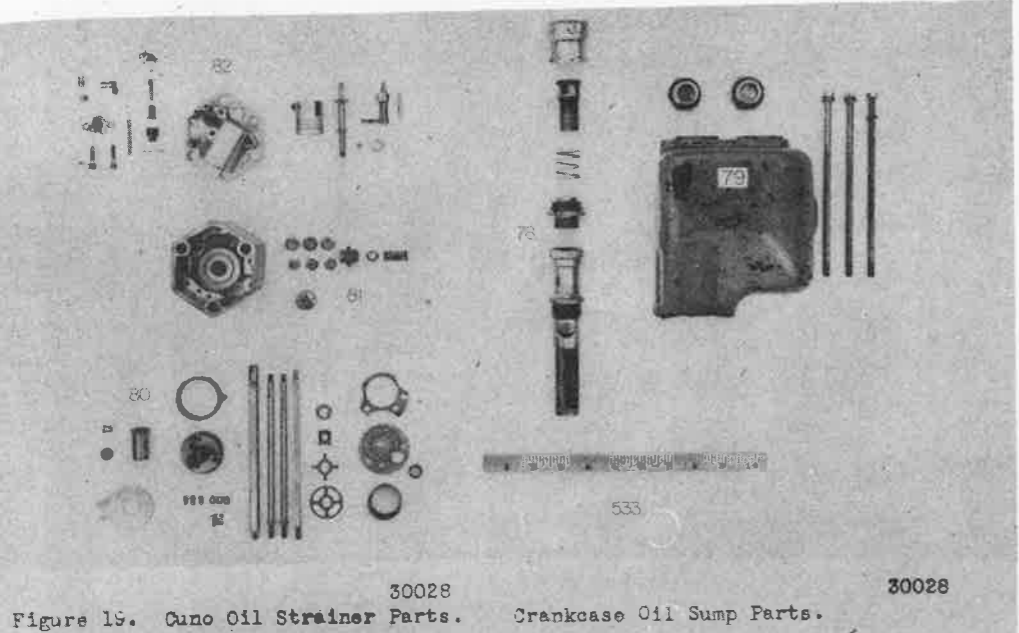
Cuno Oil Strainer Parts. Crankcase Oil Sump Parts.
